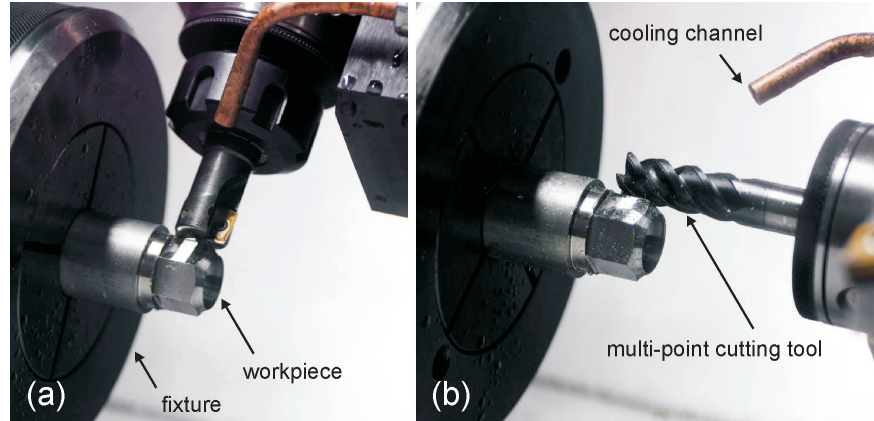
View of the inside of the milling machine showing the shaping of workpieces by multi-point cutting tools rotating with an axis (a) perpendicular (front milling) or (b) parallel (peripheral milling) to the machined surface [120].
